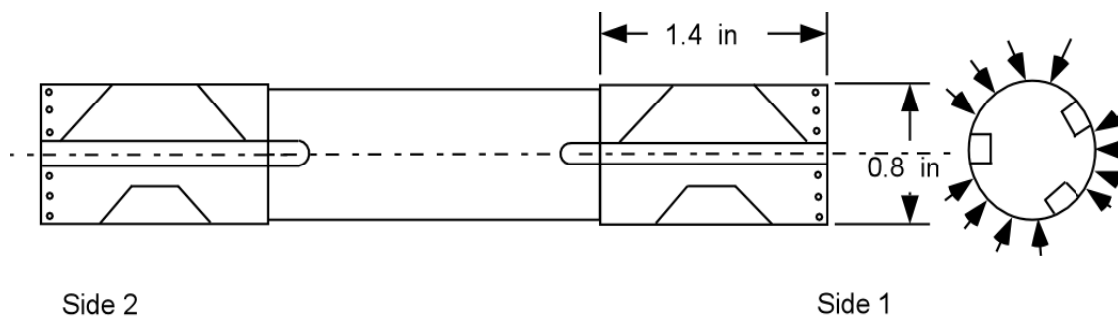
Schematic of coated air bearing showing the location of dimples (arrows around bearing)
